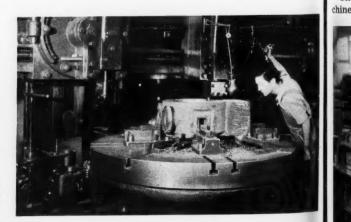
Machining Diesel Engine Cylinder Heads on a Cincinnati Boring Mill
